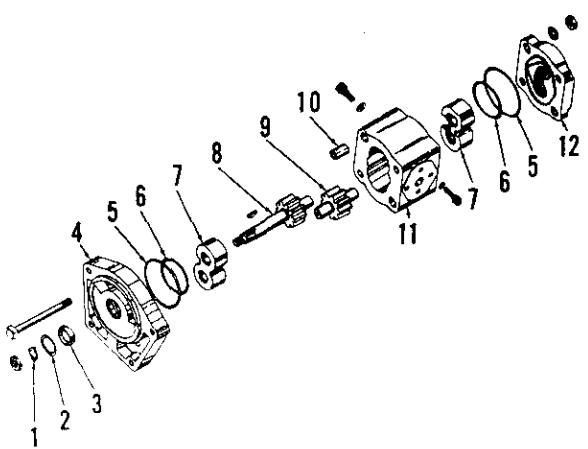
Exploded view of hydraulic pump used on Series B-414, 354, 364 and 384 tractors not equipped with power steering and Series 424, 444, 2424 and 2444 diesel tractors.
